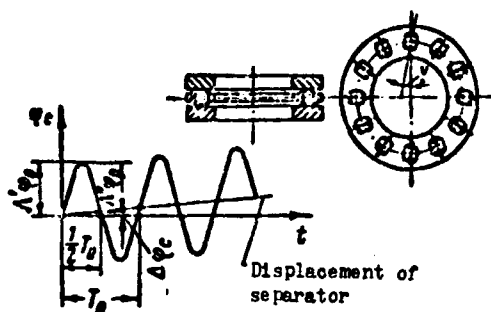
Thrust bearing with turned rollers; recording of motion of bearing separator with vibrating motion.
